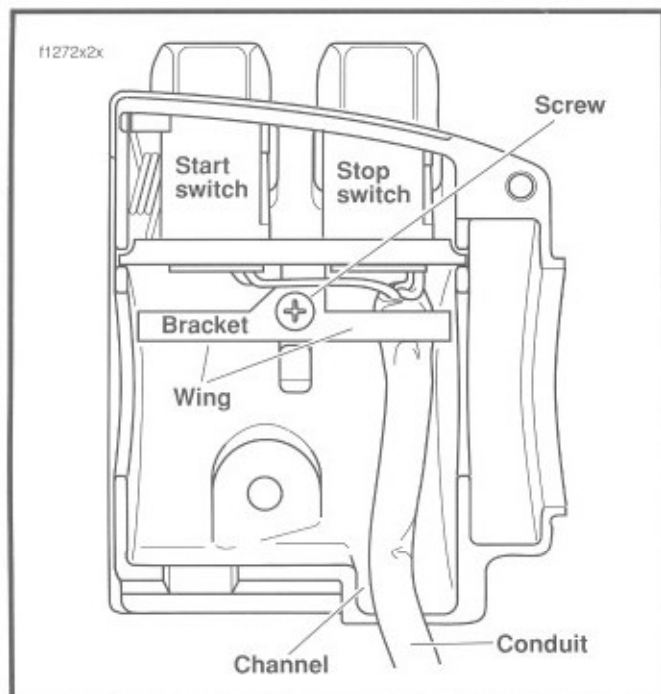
Upper Right Handlebar Switch Housing (Without Splices)
